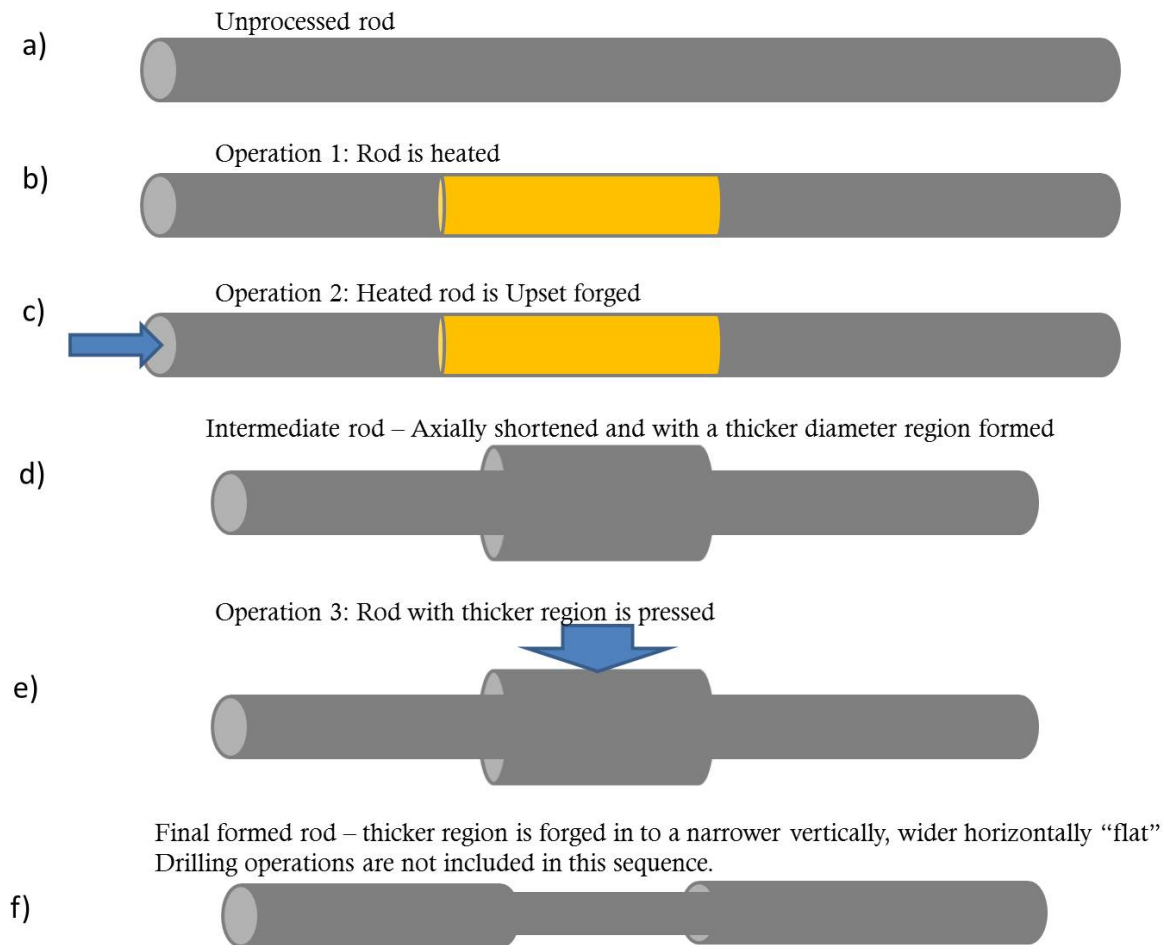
Various stages of processing operations on the medium carbon boron steel rod, to yield the flattened section fit for mechanical attachment to a conveyor system.
